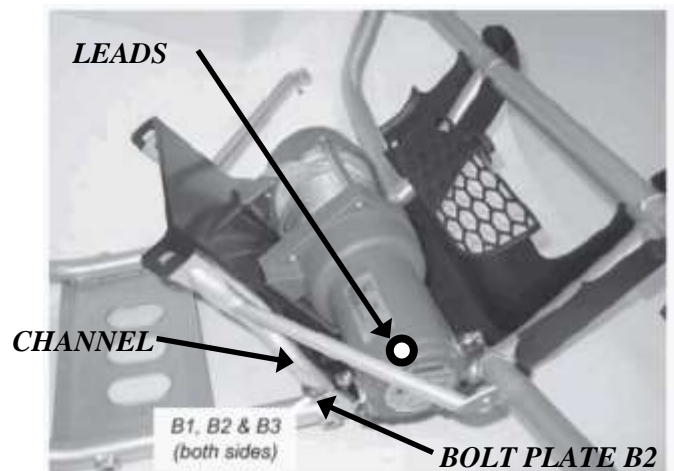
Place Mounting Plate, Fairlead, and Winch onto front Bumper
